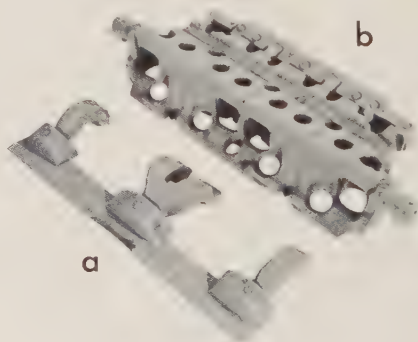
In coring the production cylinder head (a) the exhaust-port cores slide through openings in the water-jacket core (b). This operation takes place on the molding line.
